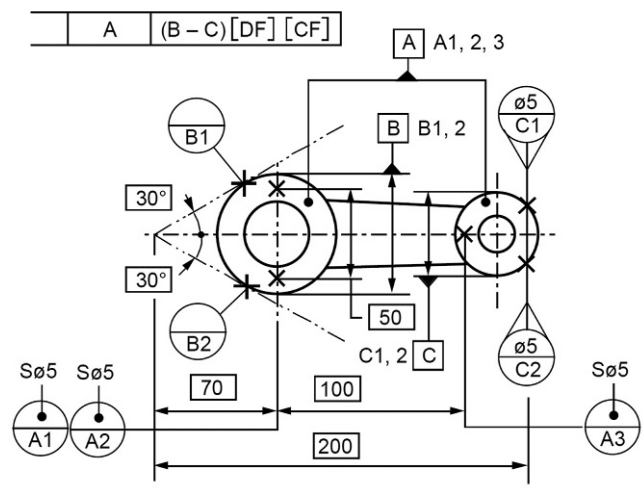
Datum target system using a three-jaw chuck
